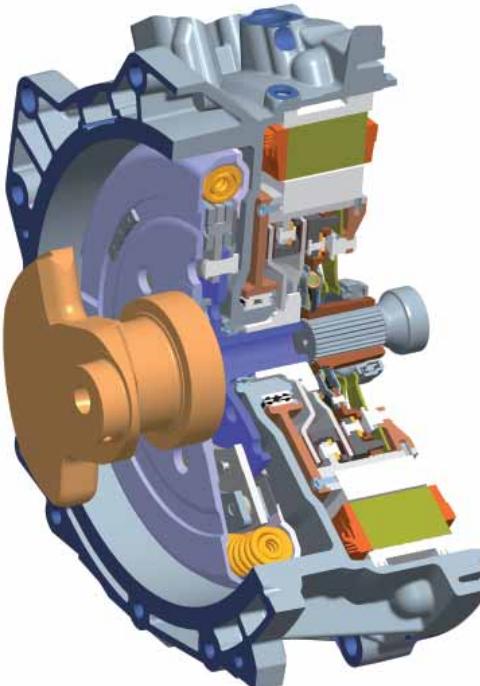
P2 hybrid module with dry separation clutch integrated in the rotor
